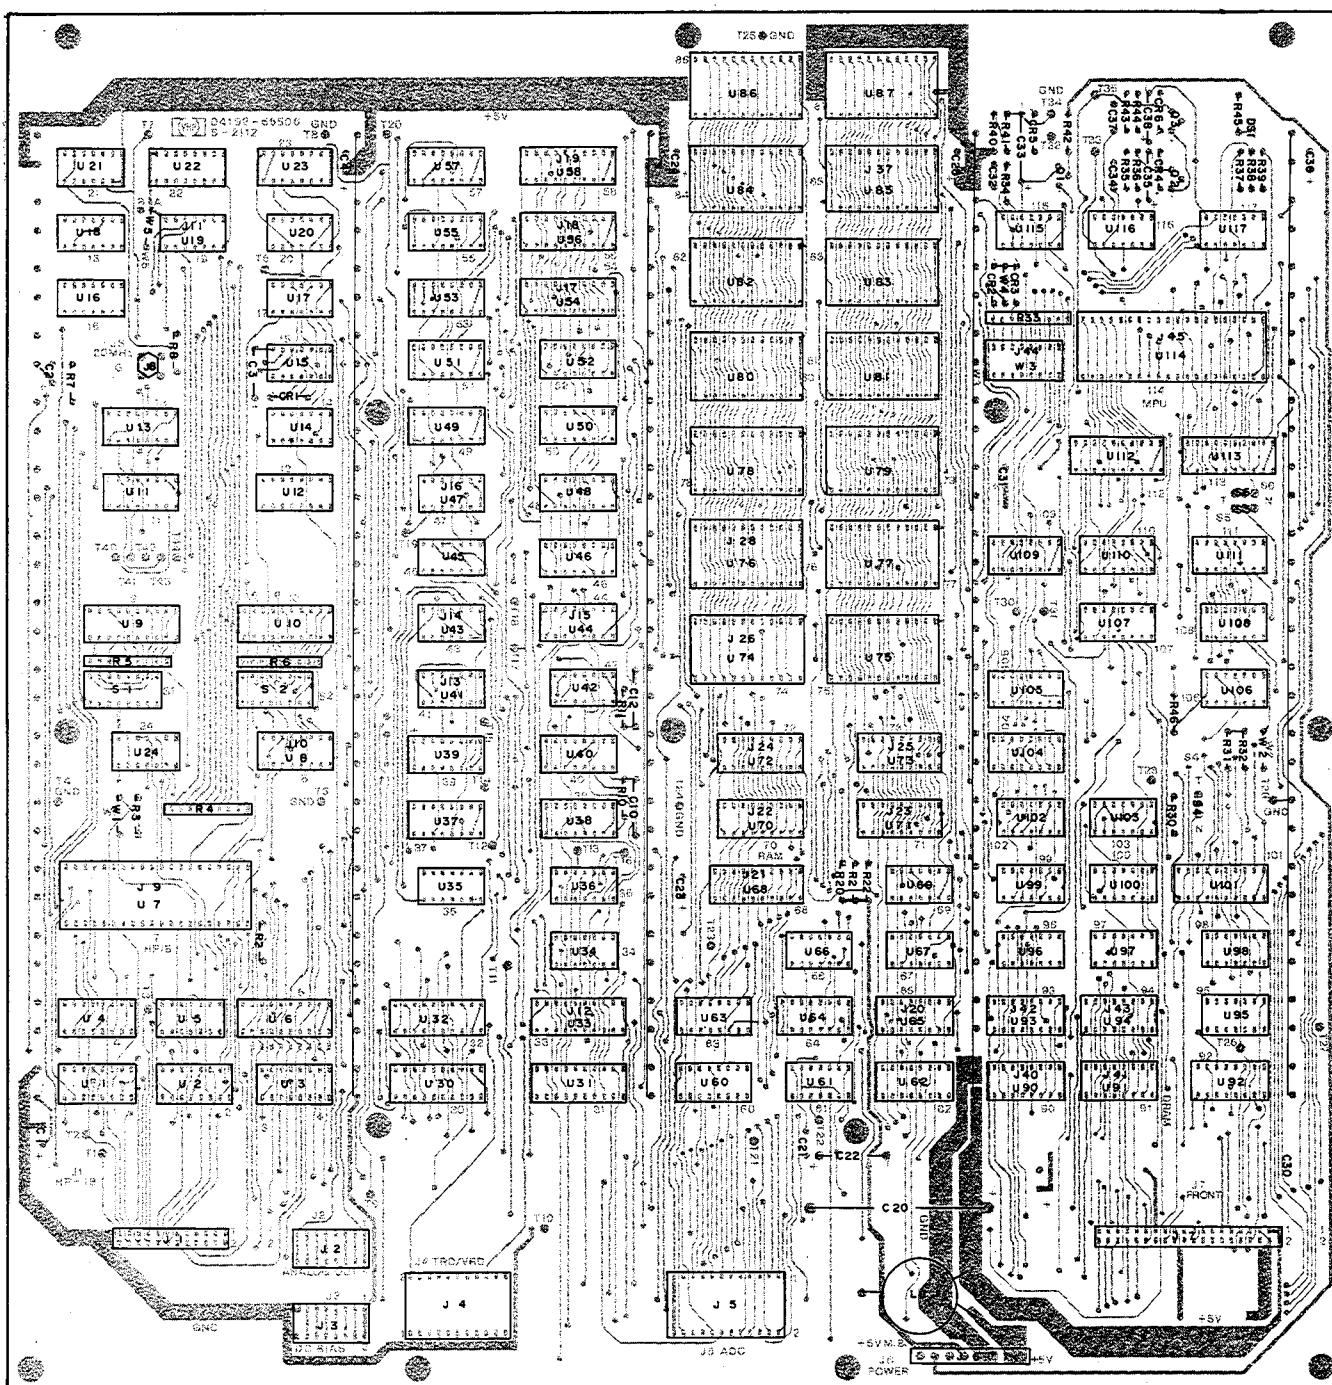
A6 Microprocessor Digital Control Board Assembly Component Locations.
